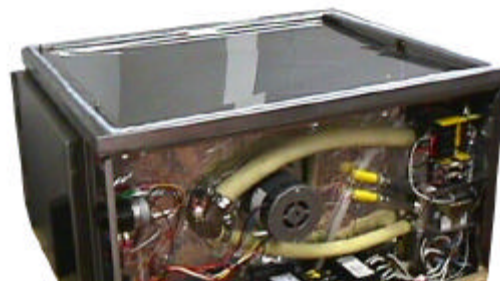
Install top cover from new unit on lower unit, attaching to corner support brackets.
